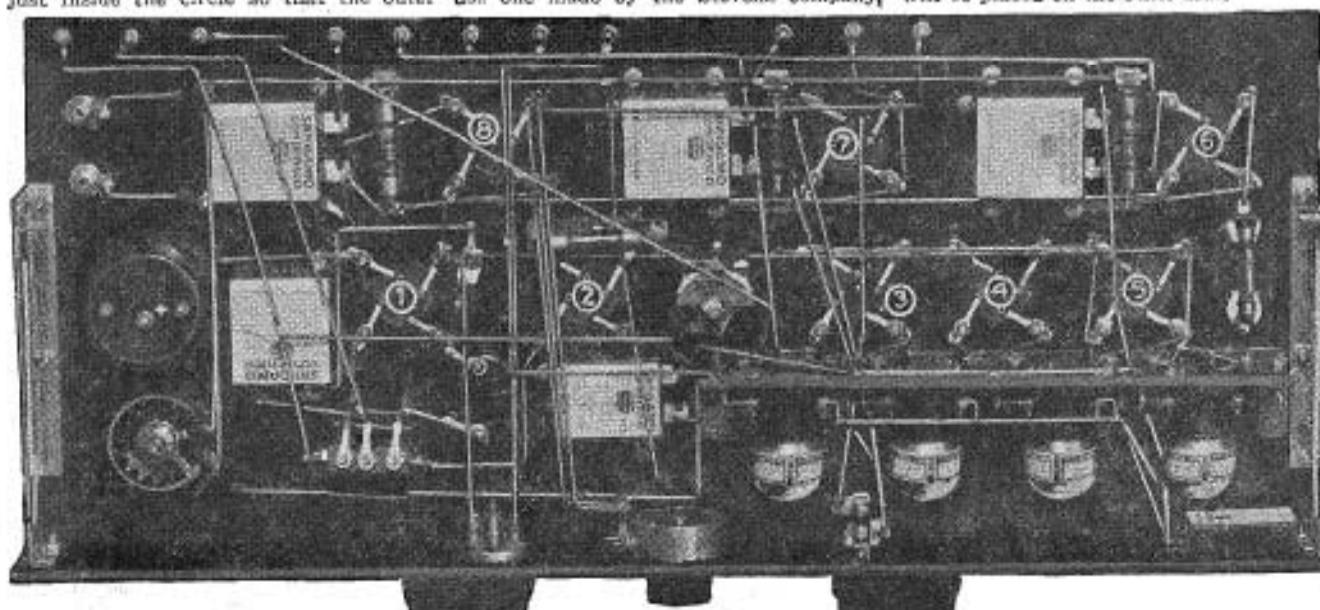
Bottom View of Completed Receiver Showing Wiring and Numbered Sockets
